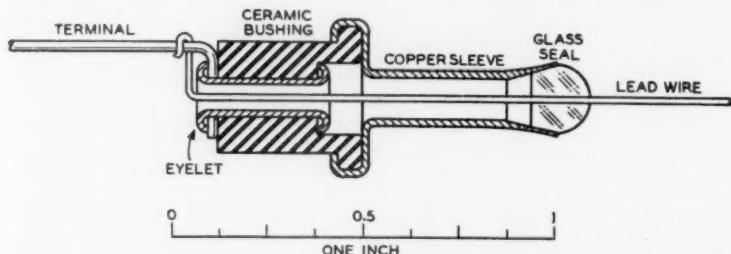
Terminal used in hermetically sealed filters. The copper sleeve, bonded to the lead wire by means of an insulating glass bead, is soldered into the container of the filter in final assembly.
